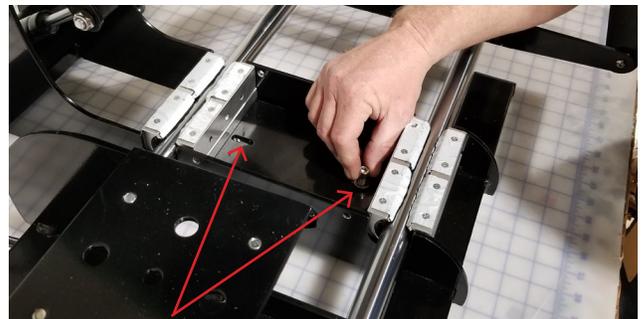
Place the shuttle. Slightly tighten the screws in the middle
